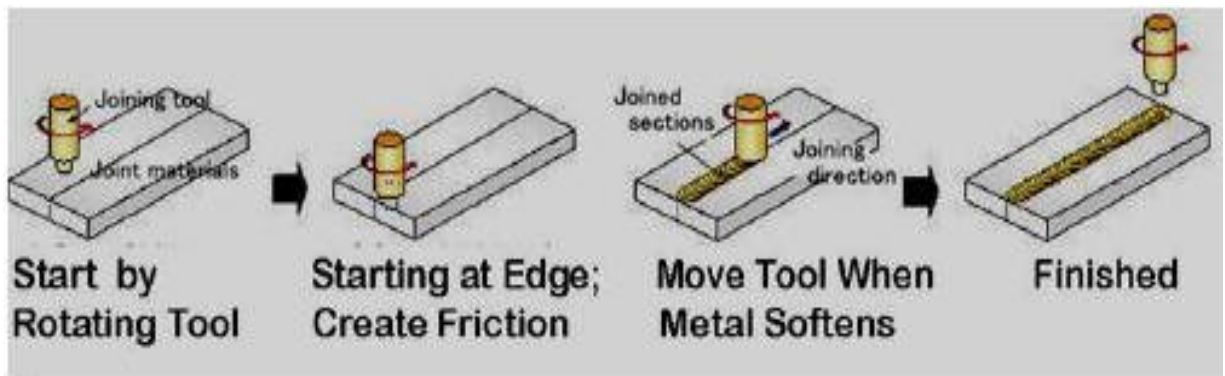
Four Steps of Friction Stir Welding Process [5]
